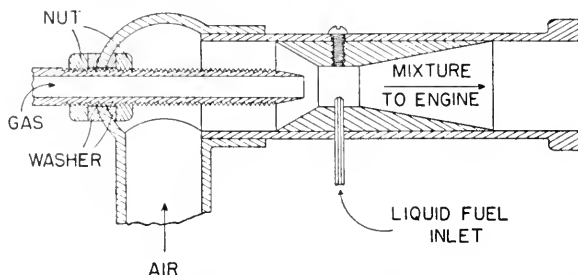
Carburetor arrangement used for running the C.F.R. engine on town gas.
